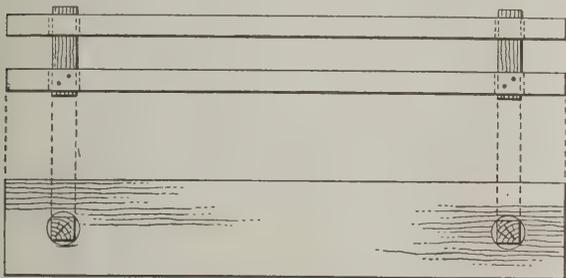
Plan and Elevation of Form of Clamp Sometimes Used
